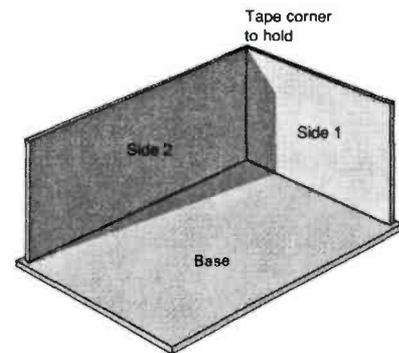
Assembling the box, using tape to hold the corners together before the adhesive is applied.
